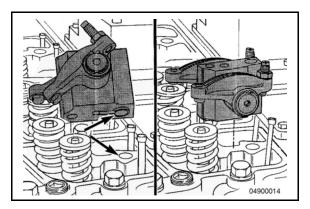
DOWEL RINGS INSTALLED INTO DOWEL BORES
